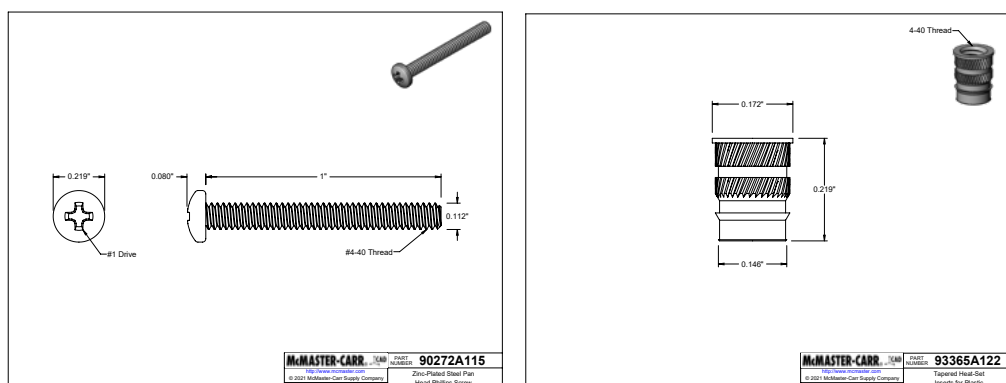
Screw and Heat-Set Inserts to Mount the Lid to the Bottom
